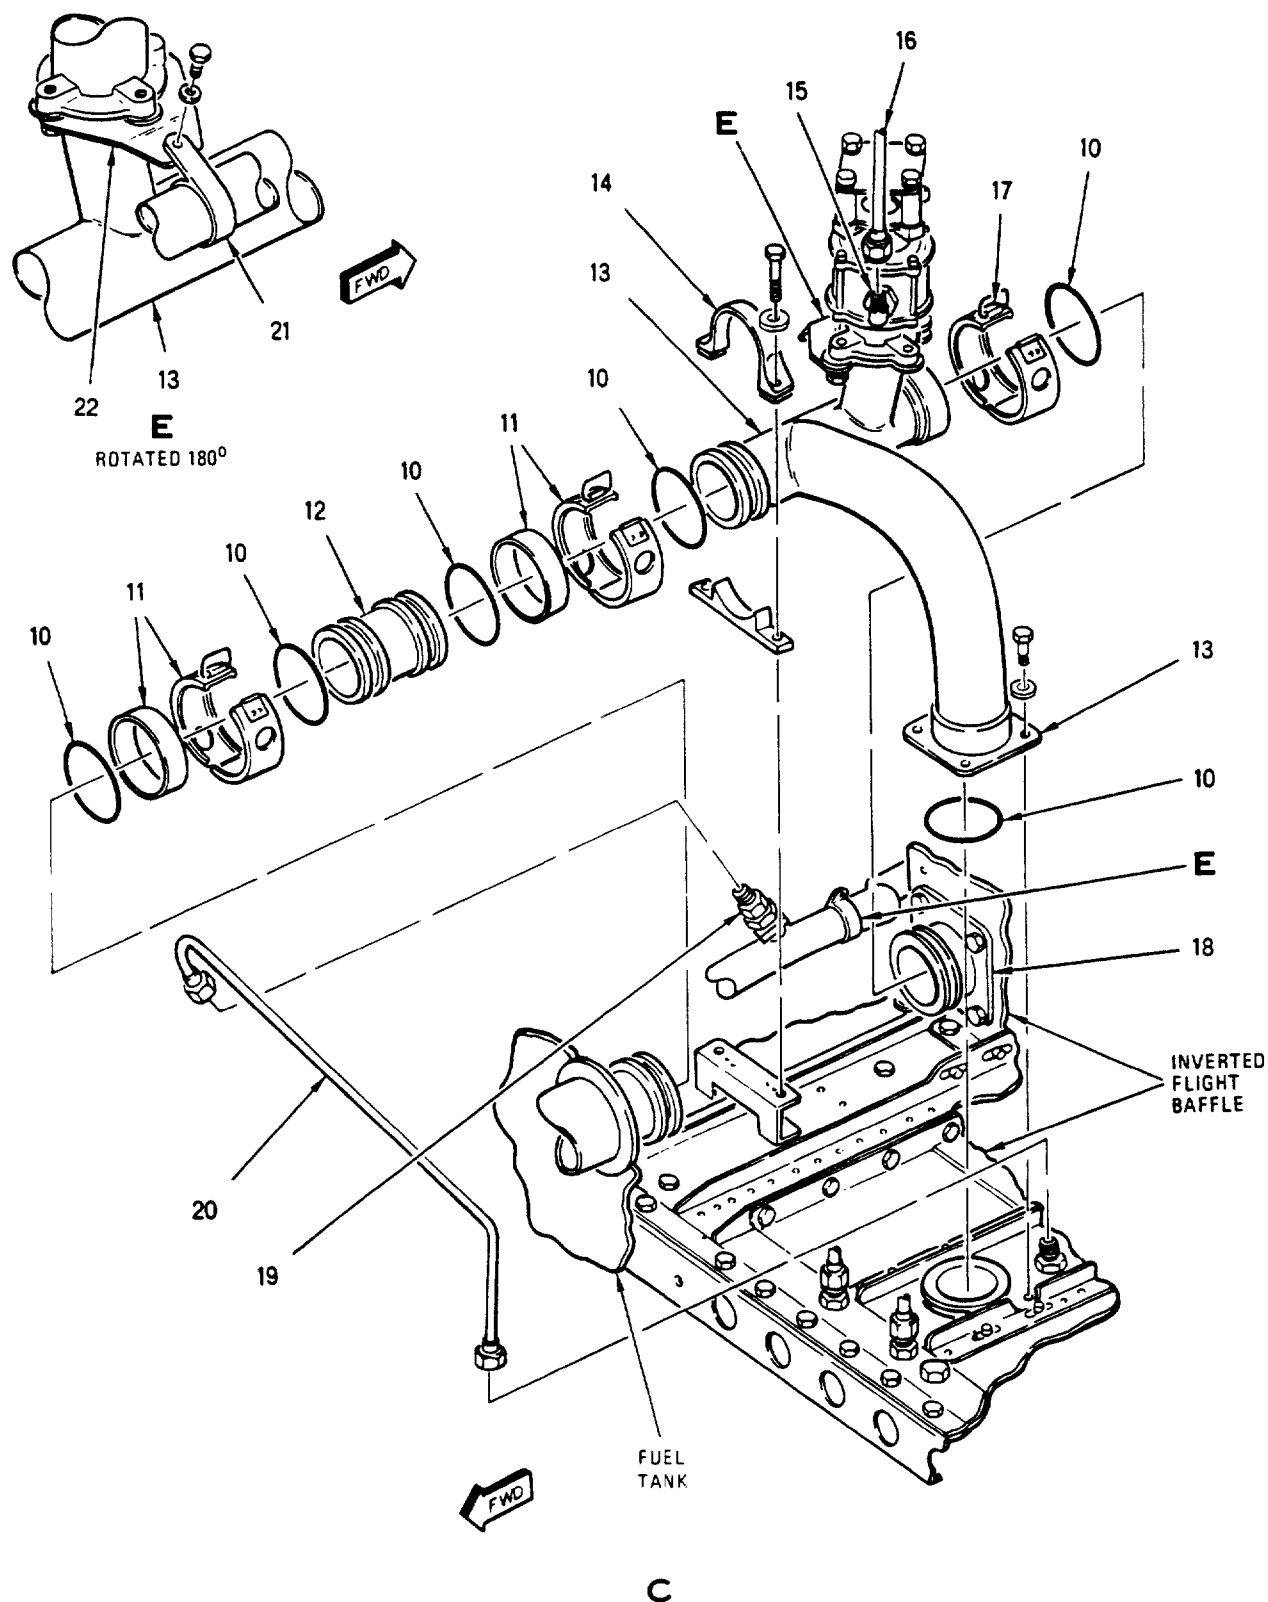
Defuel Valve (5VAP521) (Sheet 3)
